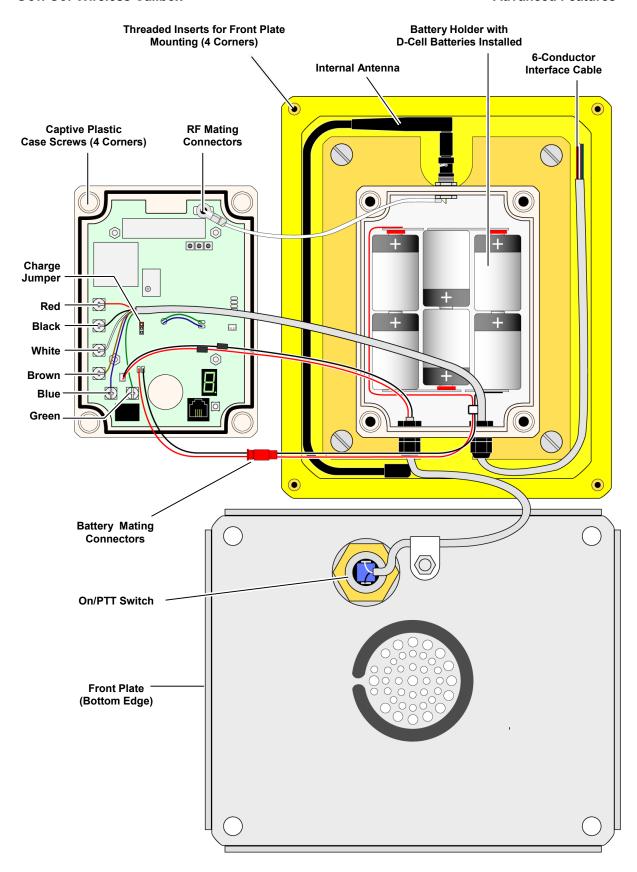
XT Callbox GateGuard Assembly with Battery Back-up
